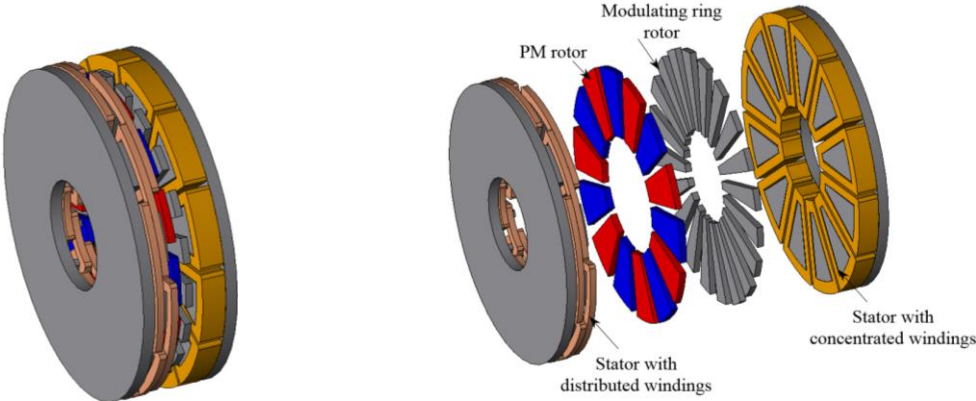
Magnetic geared machine presented in [LAI16].
